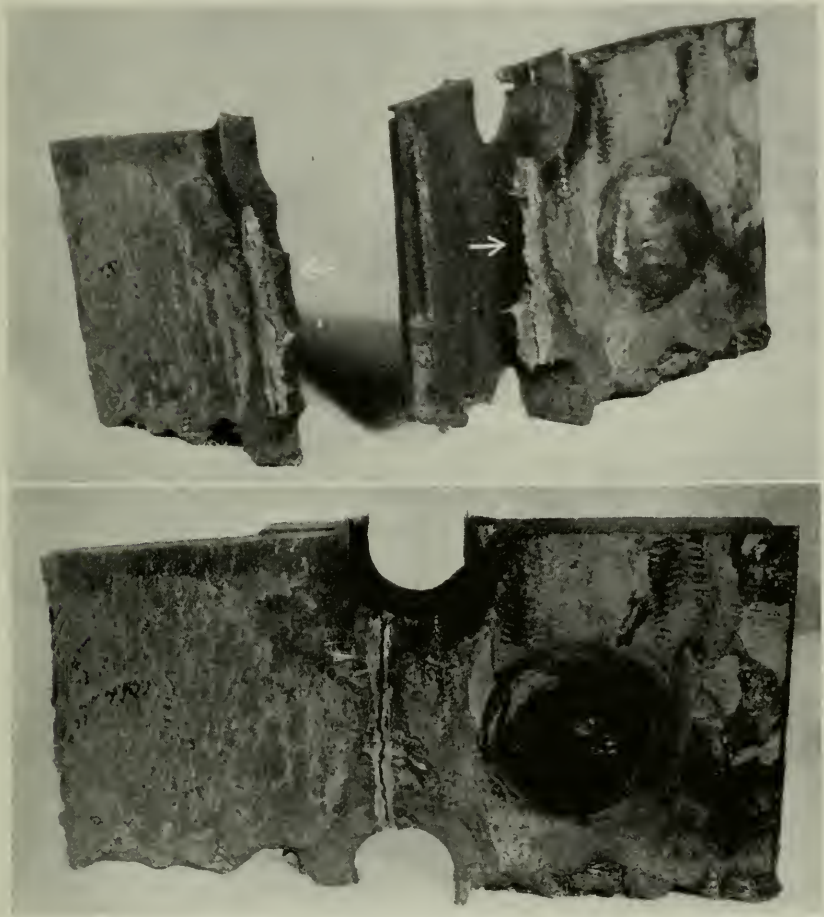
A fully developed embrittlement defect in metal from one of the steamer's boilers. The lower picture shows the rivet hole to rivet hole direction of the disintegration. The top picture is of the same pieces of metal as the lower, the dark areas in the break illustrating the development of the embrittlement (see arrows).
